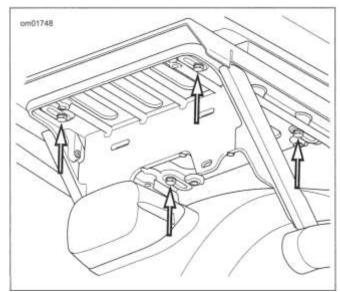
Tour-Pak Bracket Screws (APC Models) flange nuts.
